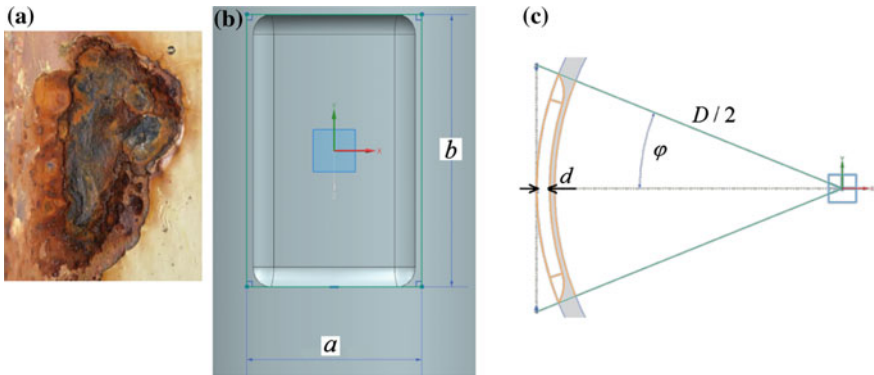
a A defect on a pipe surface due to corrosion. b The machined pocket in the defect area. c Cross-sectional view of the pocket. Here a is the longitudinal size of the defect, D is the pipe outside diameter, φ is the half opening defect angle, d is the defect depth
